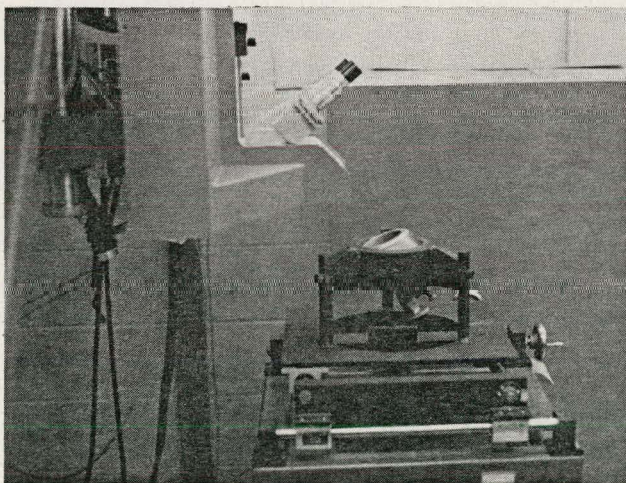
Rotational and angular tooling for centerline T/C welding.
